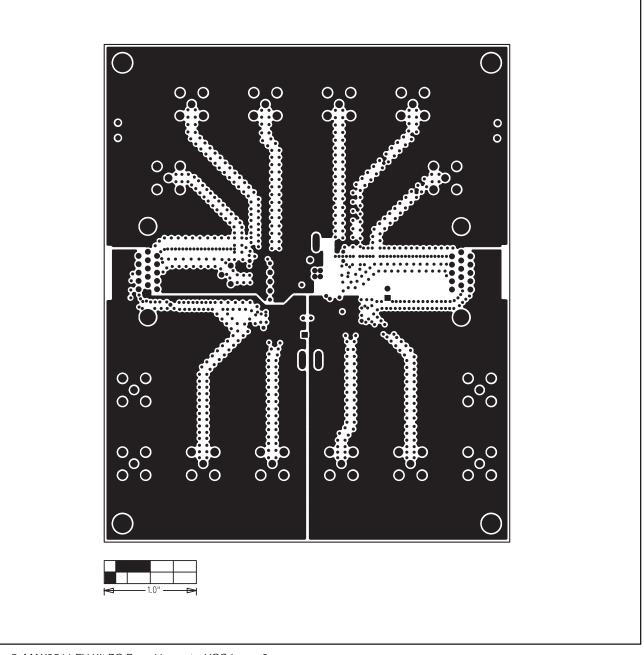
MAX9511 EV Kit PC Board Layout—VCC Layer 3
